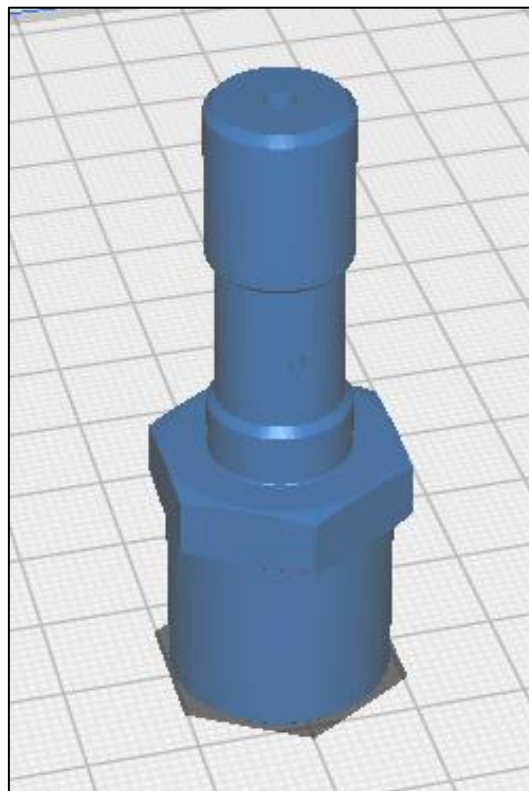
CAD drawing of the M-345 Connector. (© Leonardo S.p.A.)
